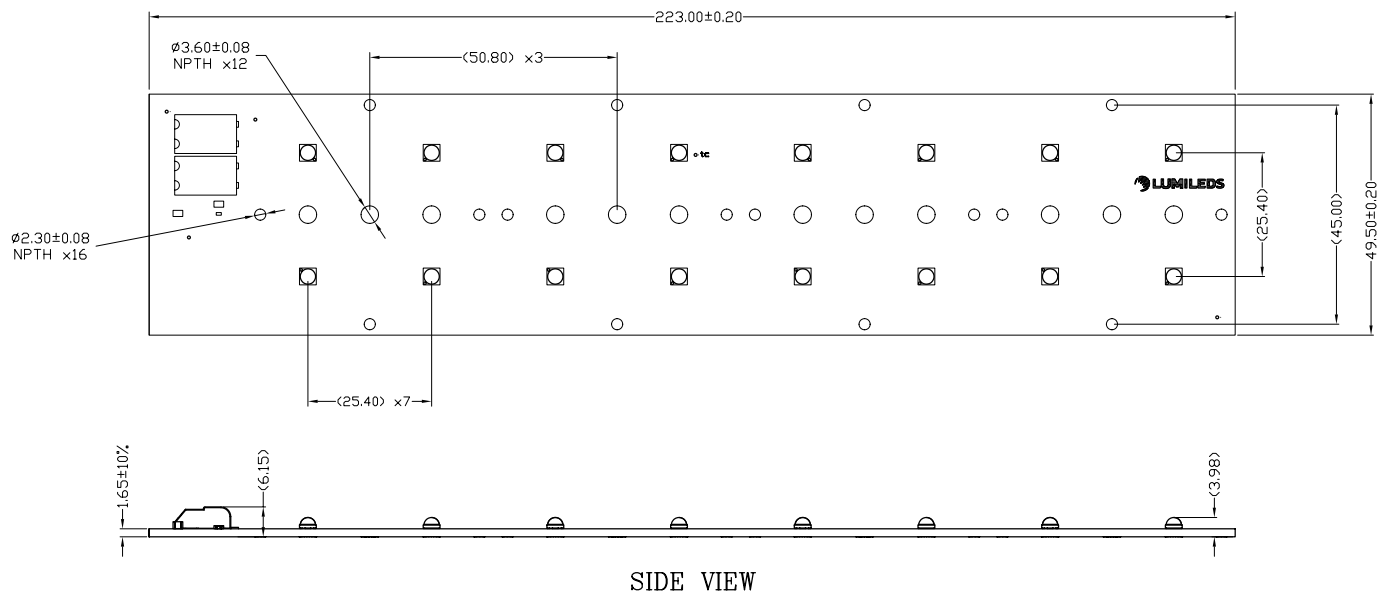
Mechanical dimensions for L213-xxxx016MDE001.
